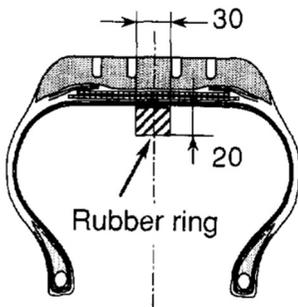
Attachment of rubber ring on inside surface of center part of tread surface (source from Iwao and Yamazaki, 1996 [95], Fig. 13; reprinted under fair use provision)
